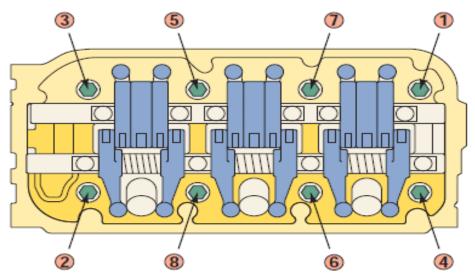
When loosening cylinder head bolts; follow the sequence given by the manufacturer.
